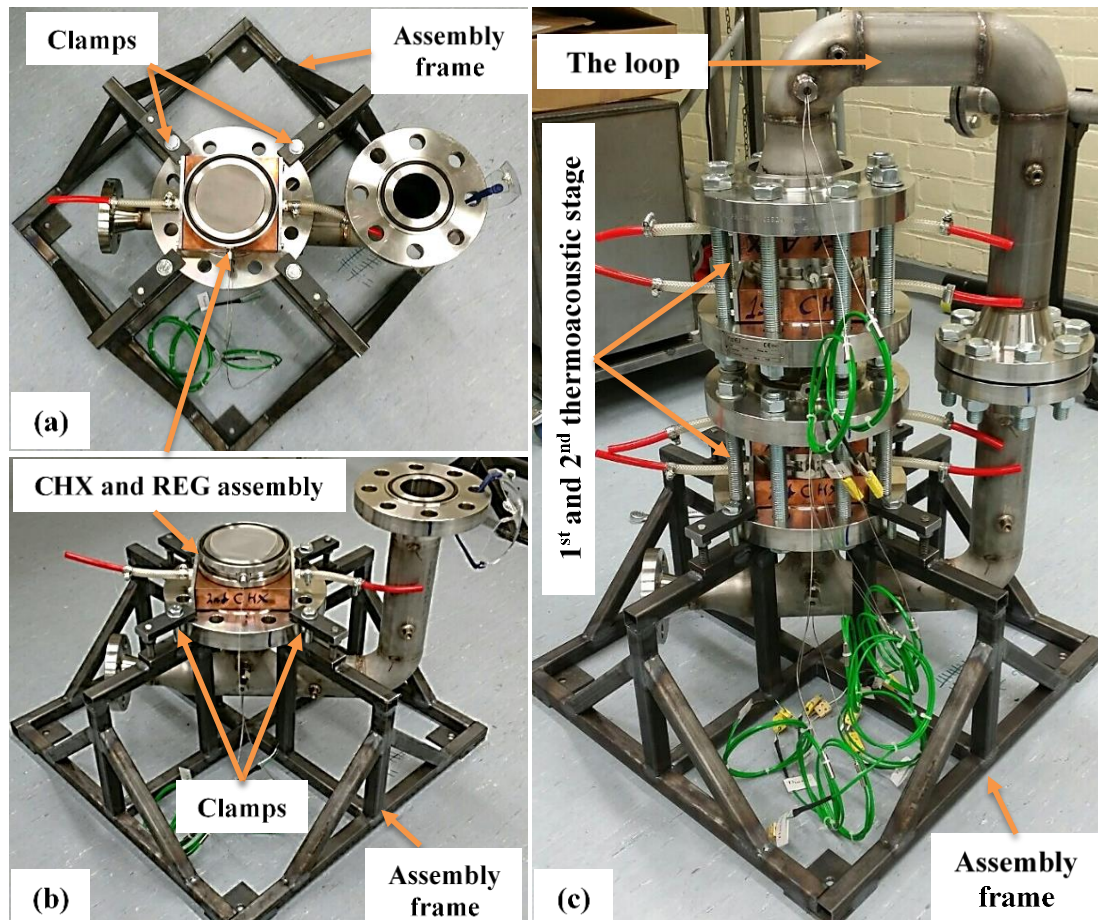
A top view photograph (a) and two side view photographs (b and c) show the steps of assembling the two thermoacoustic cores and loop by utilizing the assembly frame.
